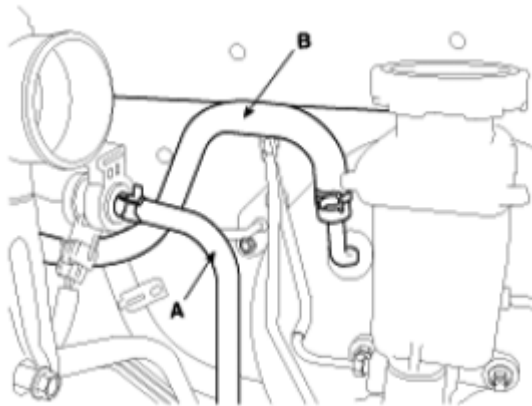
Identifying PCSV (Purge Control Solenoid Valve) Hose And Brake Booster Vacuum Hose
